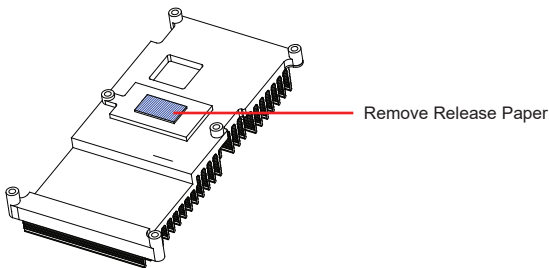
MIO-5373 Mechanical Drawing (with Heatsink)
